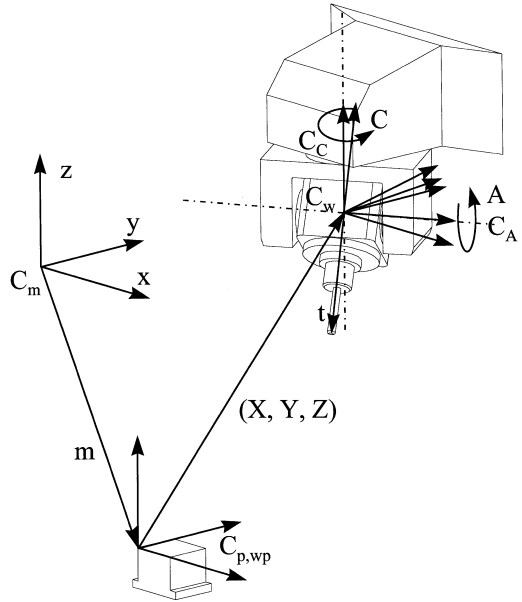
Kinematics of a 5-axis wrist type milling machine.
